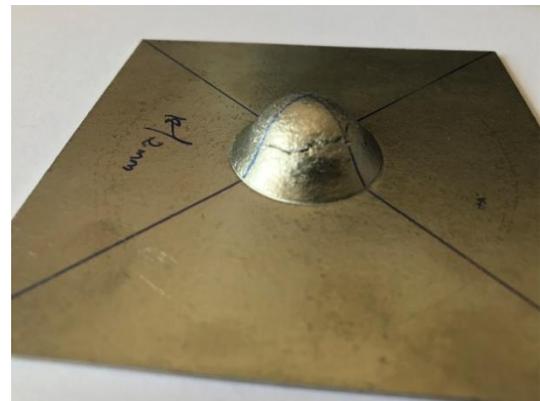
FRACTURE IN 1.5 mm THICKNESS SHEET- DRY CONDITION
